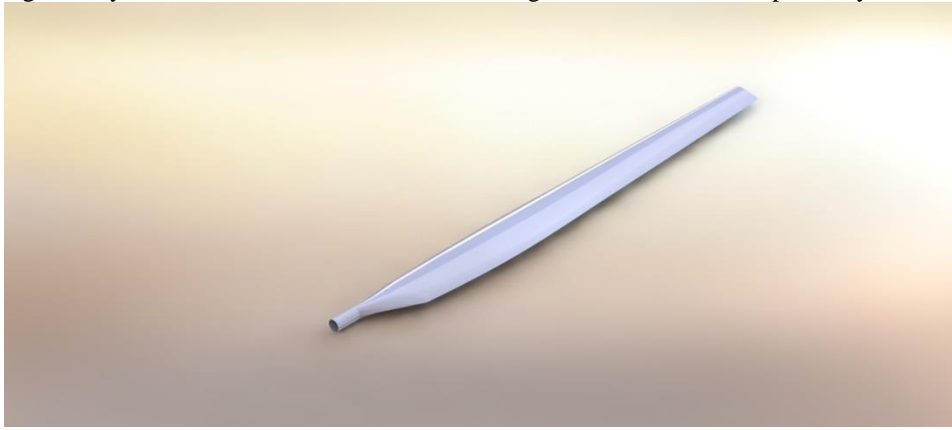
3D CAD view of the wind turbine blade model (9.5 m span).
